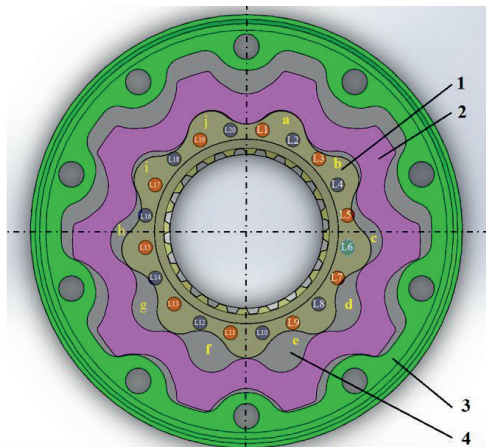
Four basic parts of the hydraulic motor ( $\Phi 174$  mm).
